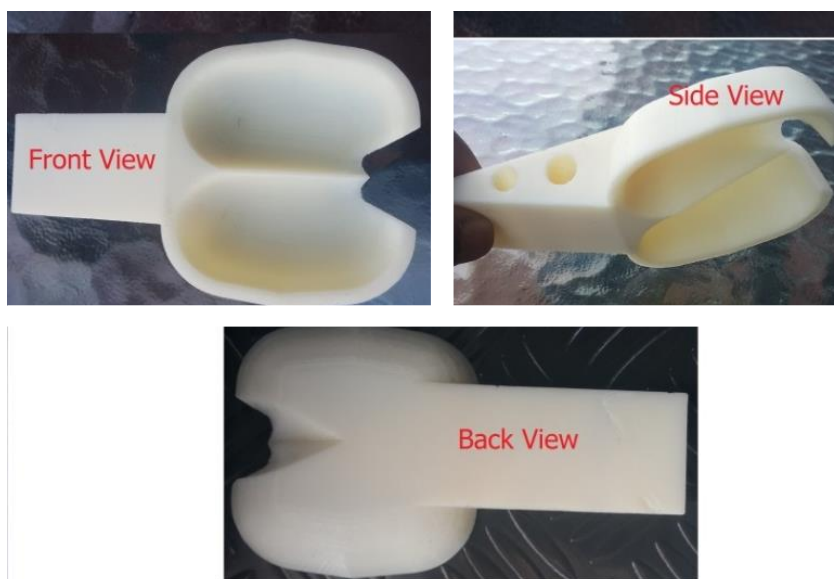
Different views of 3D printed model of master pattern for casting.
